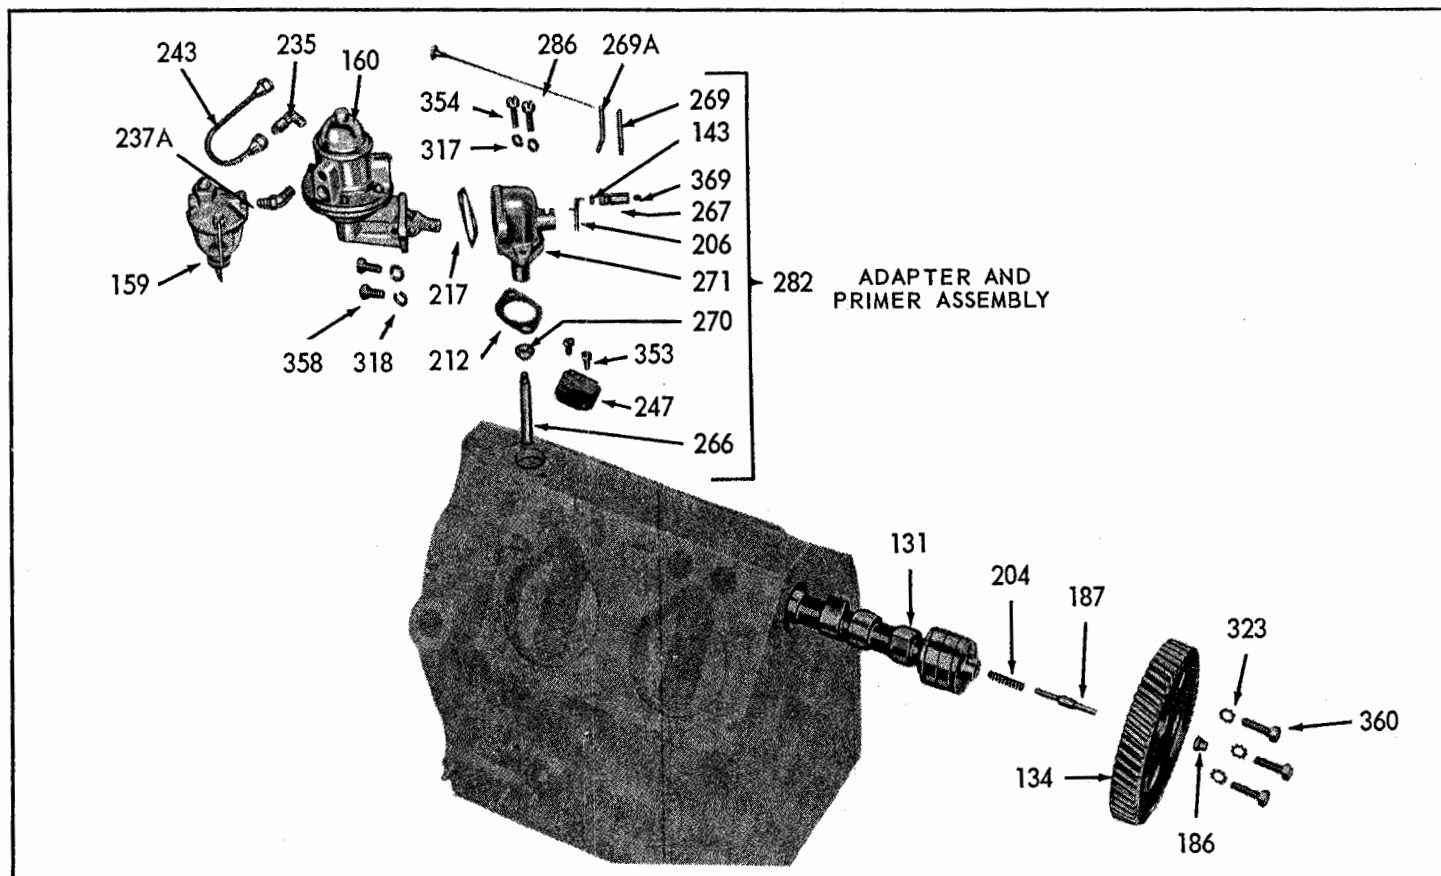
, CAMSHAFT AND FUEL PUMP MOUNTING GROUP
